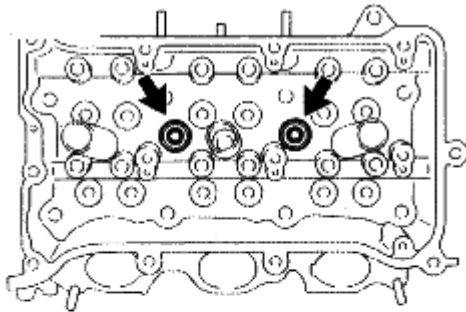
Using Compressed Air & Magnetic Finger To Remove Valve Spring Seats
